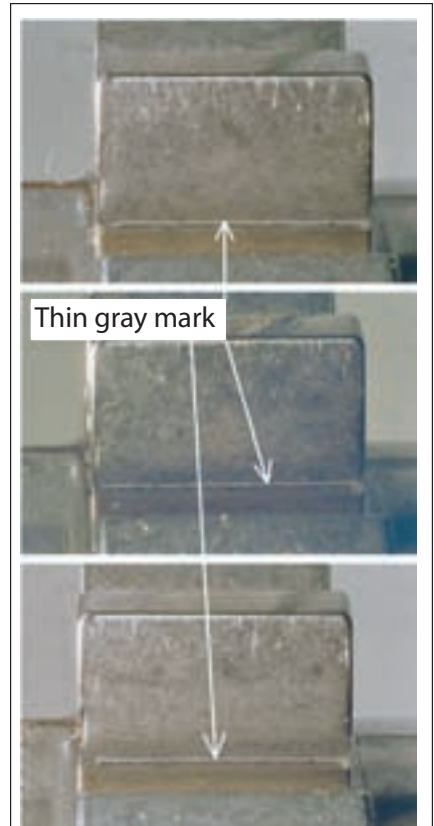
Picture of three teeth on the superfinished pinion after test run 2 (load stage test and endurance test) showing a thin gray mark that was attributed to the gears not having any tip relief. The gears show no micropitting.
